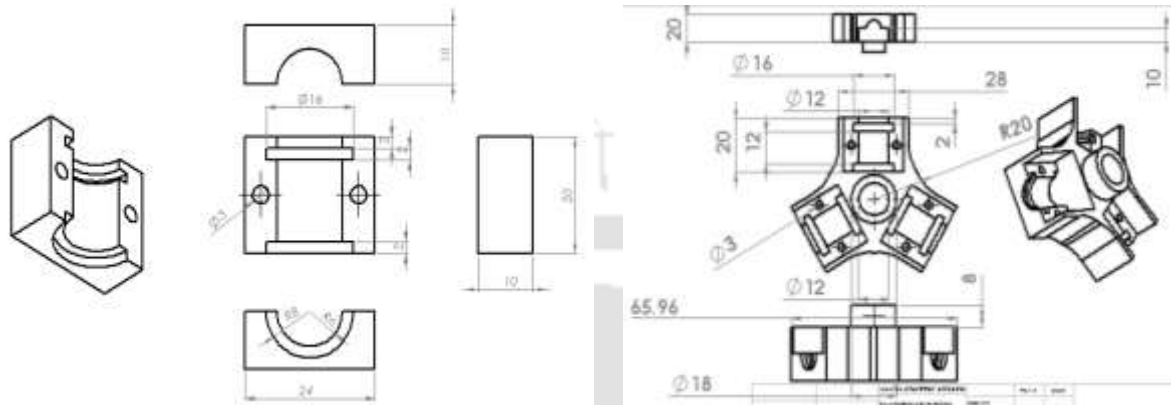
(a) Blade outer casing, and (b) back side view Hub casing
